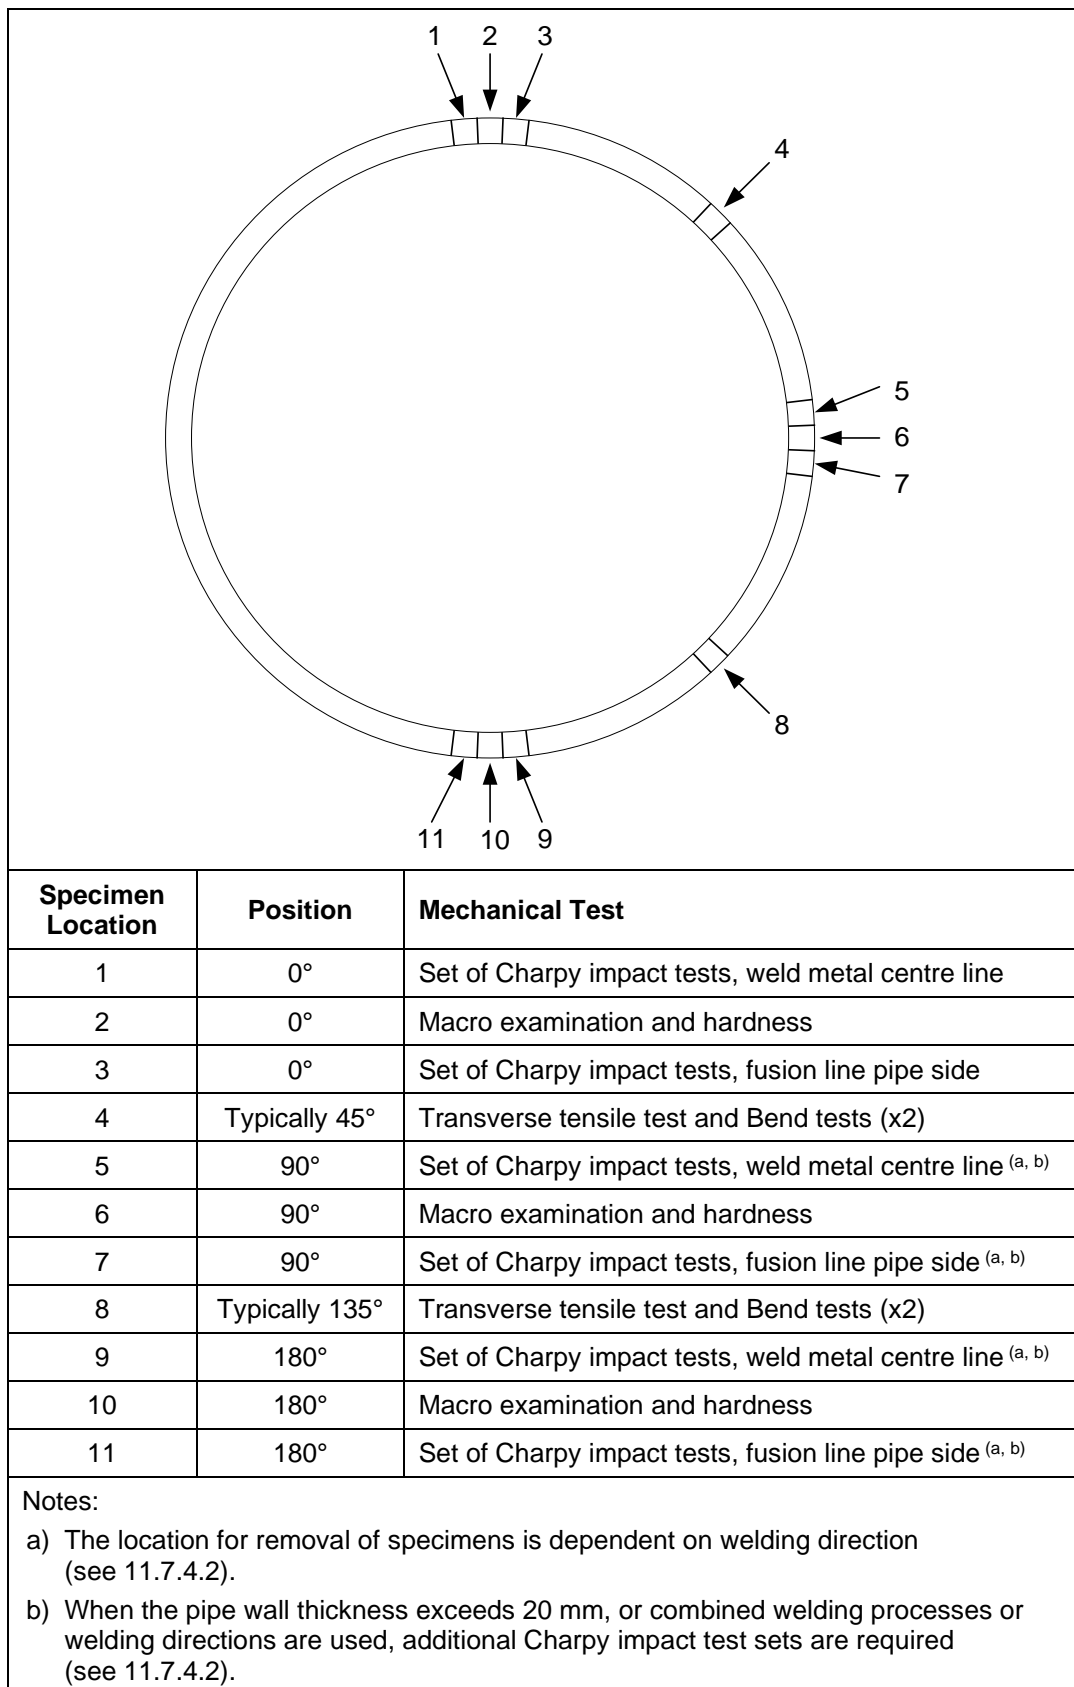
Locations for Test Specimens for Butt Welds > 114.3 mm OD.
